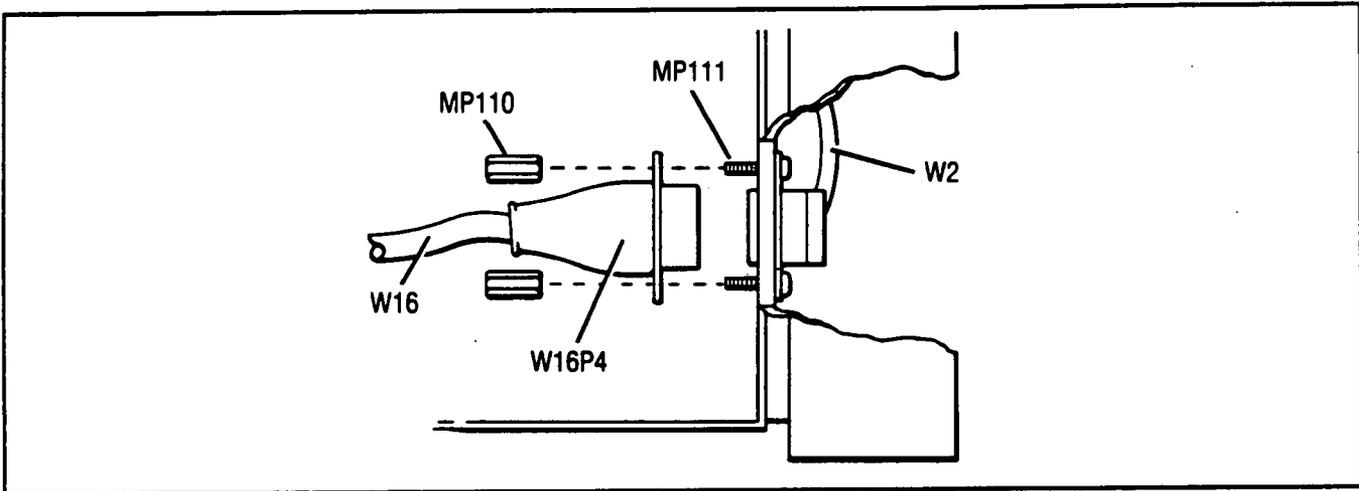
P/O A10/A11 Assembly Service Positioning
